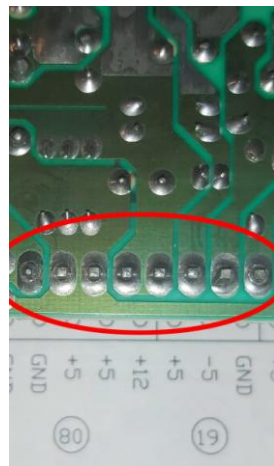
The "cold" solderings in the Ten-Tec *RX-340* power supply connector
